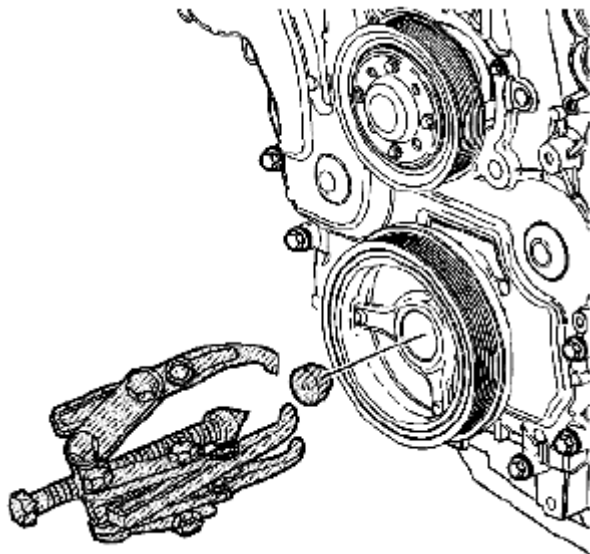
Identifying Special Tools J 38416-2 And J 41816
